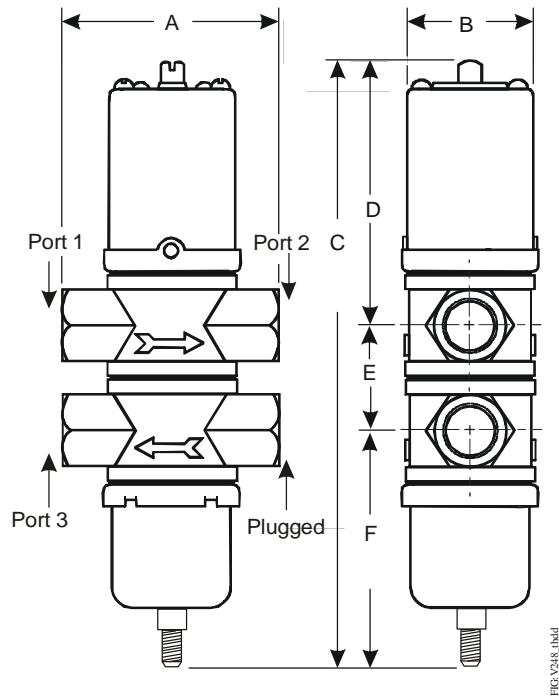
1/2 in. Through 1-1/4 in. V248 Screw Connection Valves Dimensions
